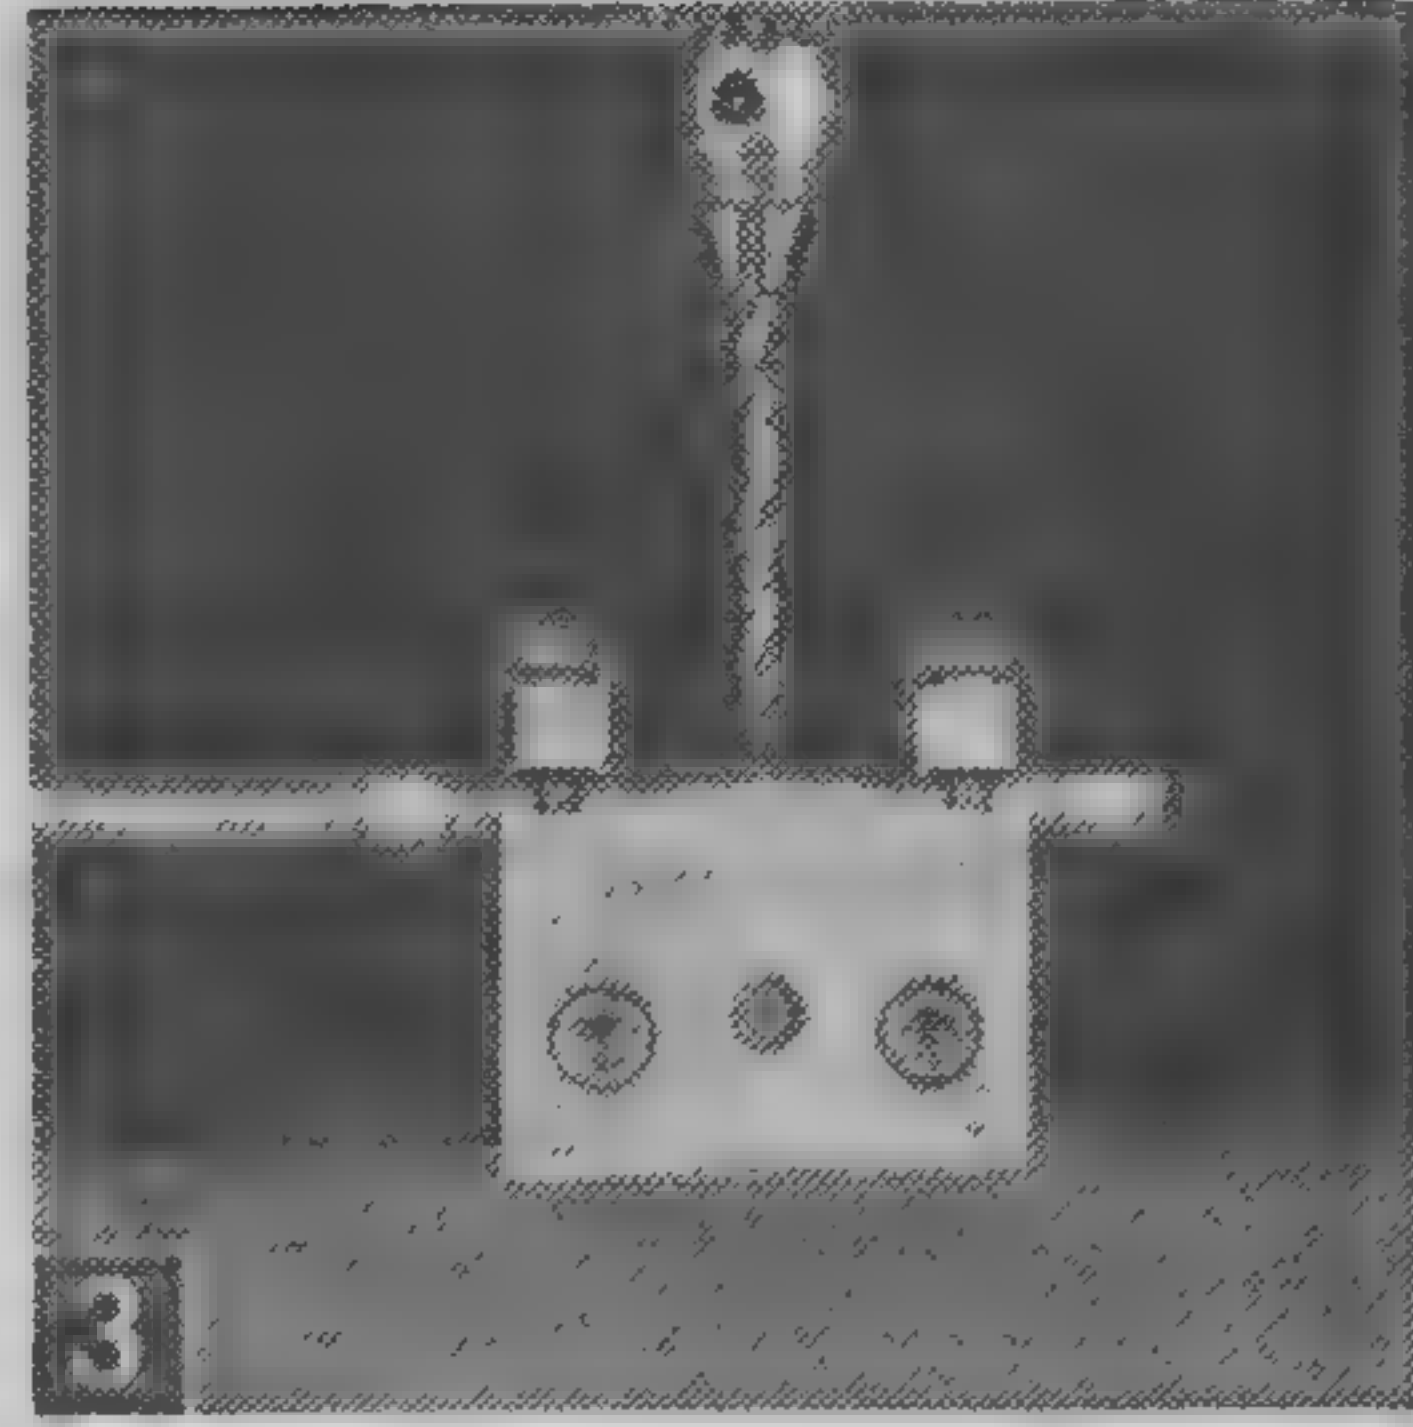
V-block setup on compound rest with small boring bar. Block is held on side by tool post stud fastened to special nut fitting T-slot. Clamp angles point inward for small diameter work. Fig. 2. Milling tool bit slot on end of a boring bar. V-block is clamped sideways in milling attachment vise. Block clamp angles point out for large diameter work. Fig. 3. For drill press operation, V-block is held to table by socket head cap screw recessed in hole counterbored through center of the V.
